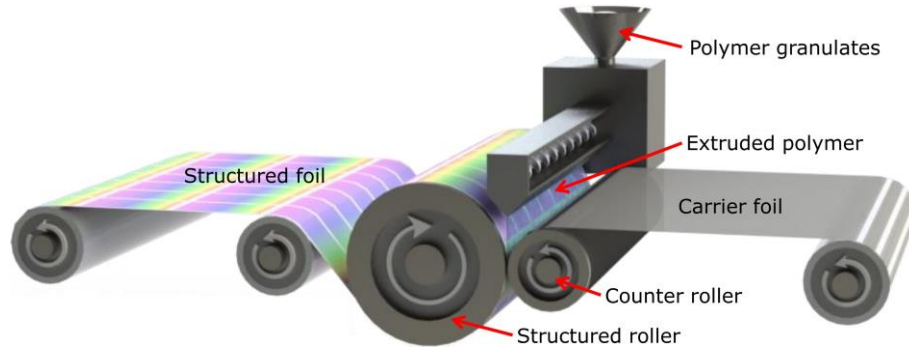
Illustration of typical roll-to-roll extrusion coating setup. Adapted from<sup>[18]</sup>.
